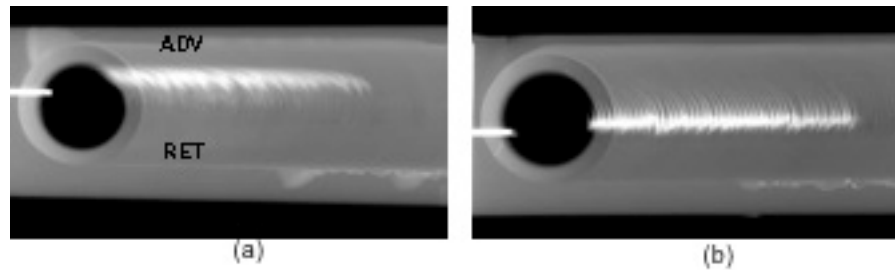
Two dimensional x-rays of welds with tracer material starting on the a) advancing and b) retreating side of the weld centerline. Tool rotation is counter clockwise.
